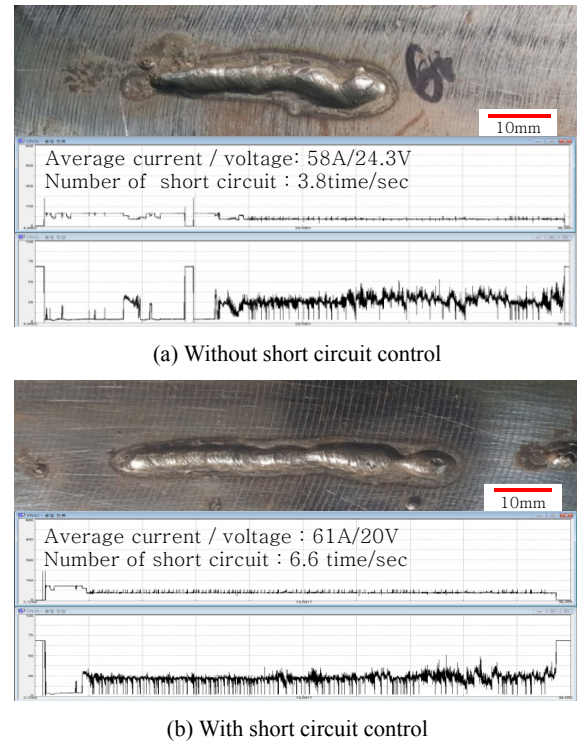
Welding bead and waveform at 60A using low hydrogen type electrode of 2.4 ϕ
